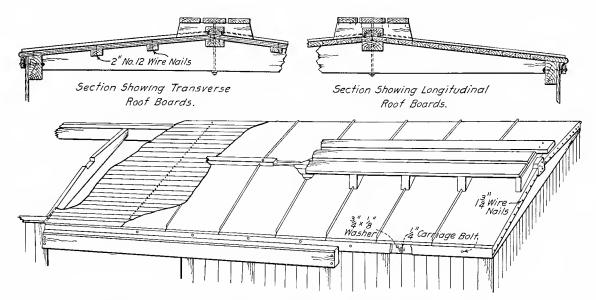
Application of No. 4 Outside Iron Roof. Chicago-Cleveland Car Roofing Company.
